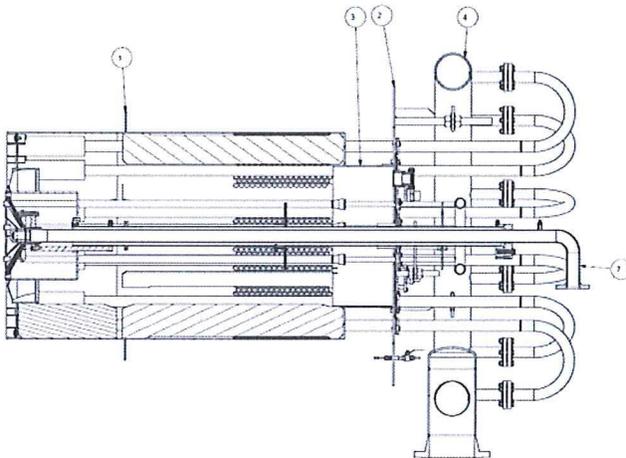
Conceptual Fives North American / Pillard Burner Cross Section View
